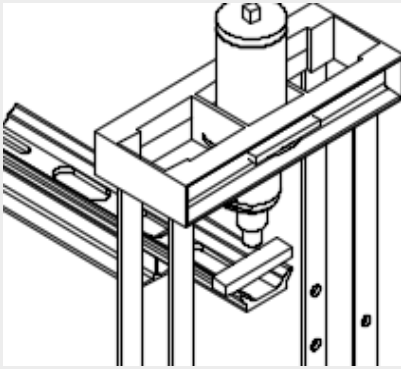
Isometric View VR30 Part, anchor, and force Block block
